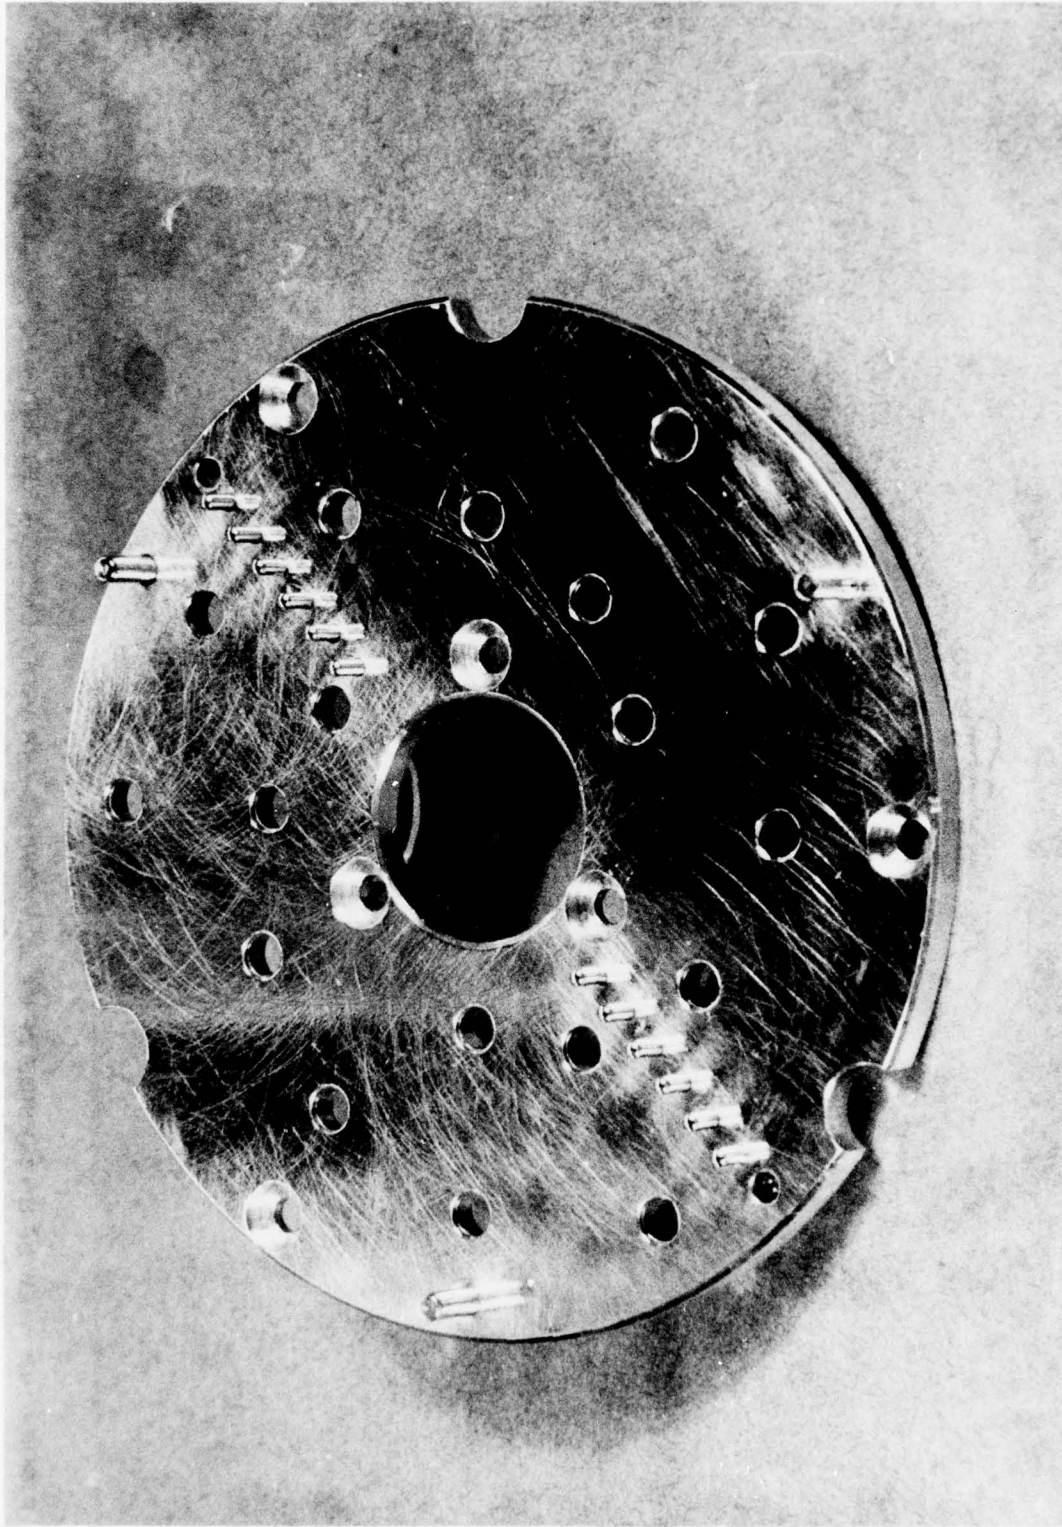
TOP VIEW OF CAGE, SHOWING RING-LOCATING AND ANTI-ROTATION PINS AND BALL-RETAINING HOLES (FLEXIBLE THRUST BEARING LLF-1T)
